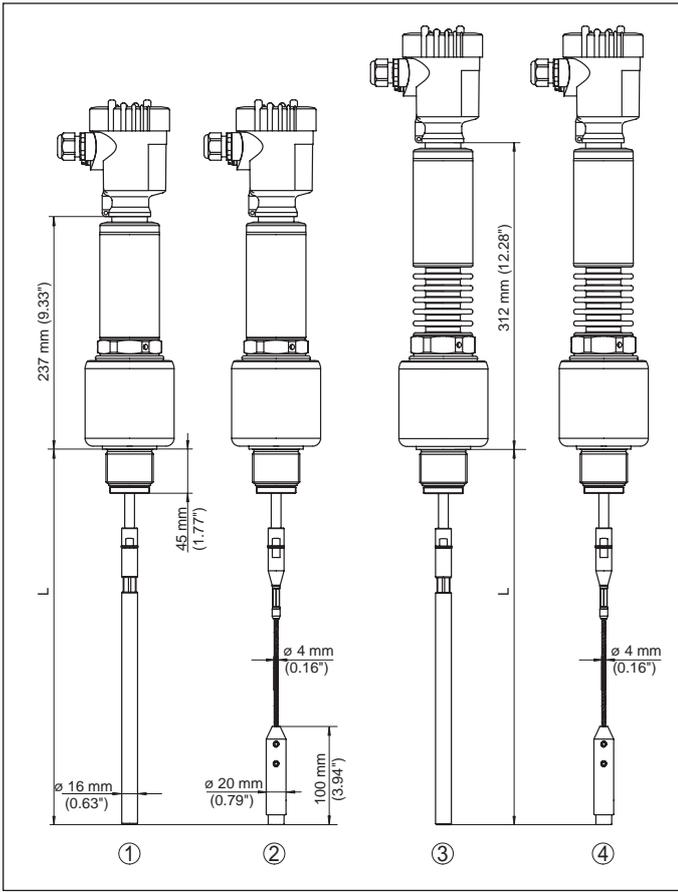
VEGAFLEX 86, cable and rod version with threaded fitting
